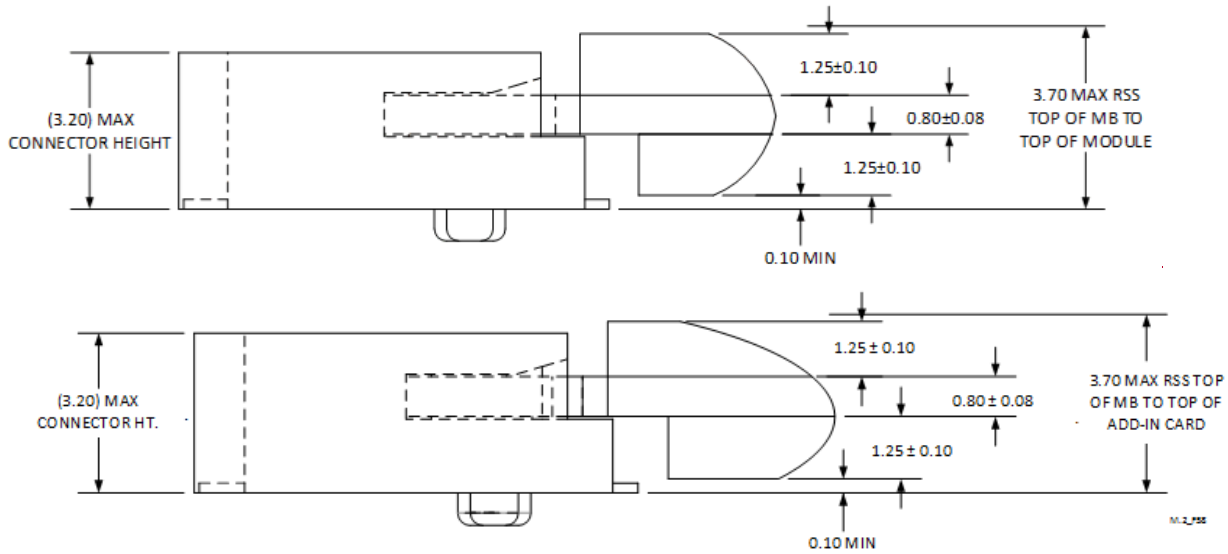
H3.2-D2 - Stack-up Top Mount Double-sided Add-in Card for 1.35 Maximum Top-side Component Height
